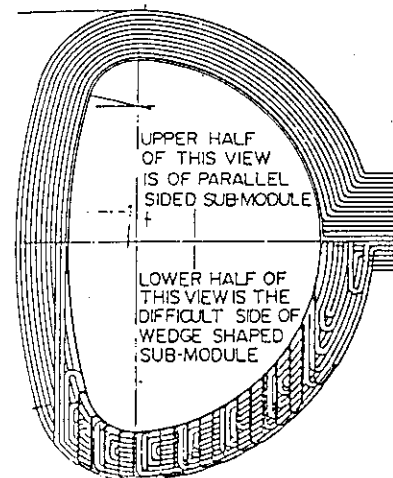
Section Through Plasma Showing Two Types of Submodules.¹⁸⁾
